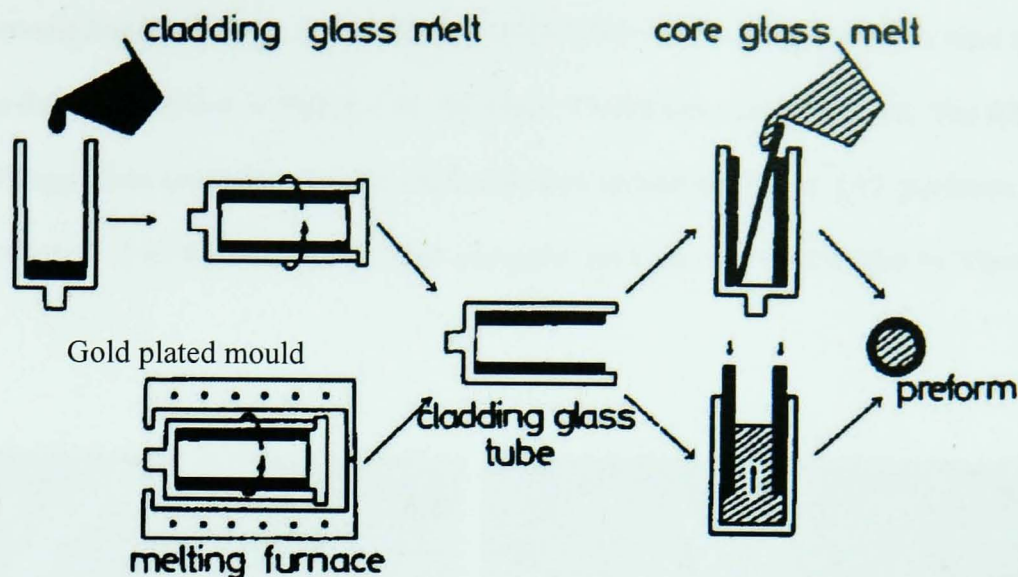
A rotational casting technique for fabricating heavy metal fluoride glass fibre optic preforms [113]. A precise amount of the cladding melt was first melted in a platinum crucible then poured into a gold-plated mould. The mould was spun at several thousand rpm to form a tube cladding. The core glass was then cast into the tube. The cast preform was then annealed.
